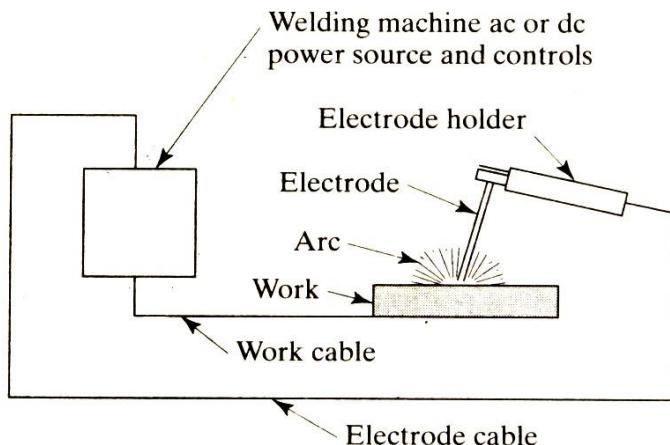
Schematic illustration of the shielded metal-arc welding operation (also known as stick welding, because the electrode is in the shape of a stick)
